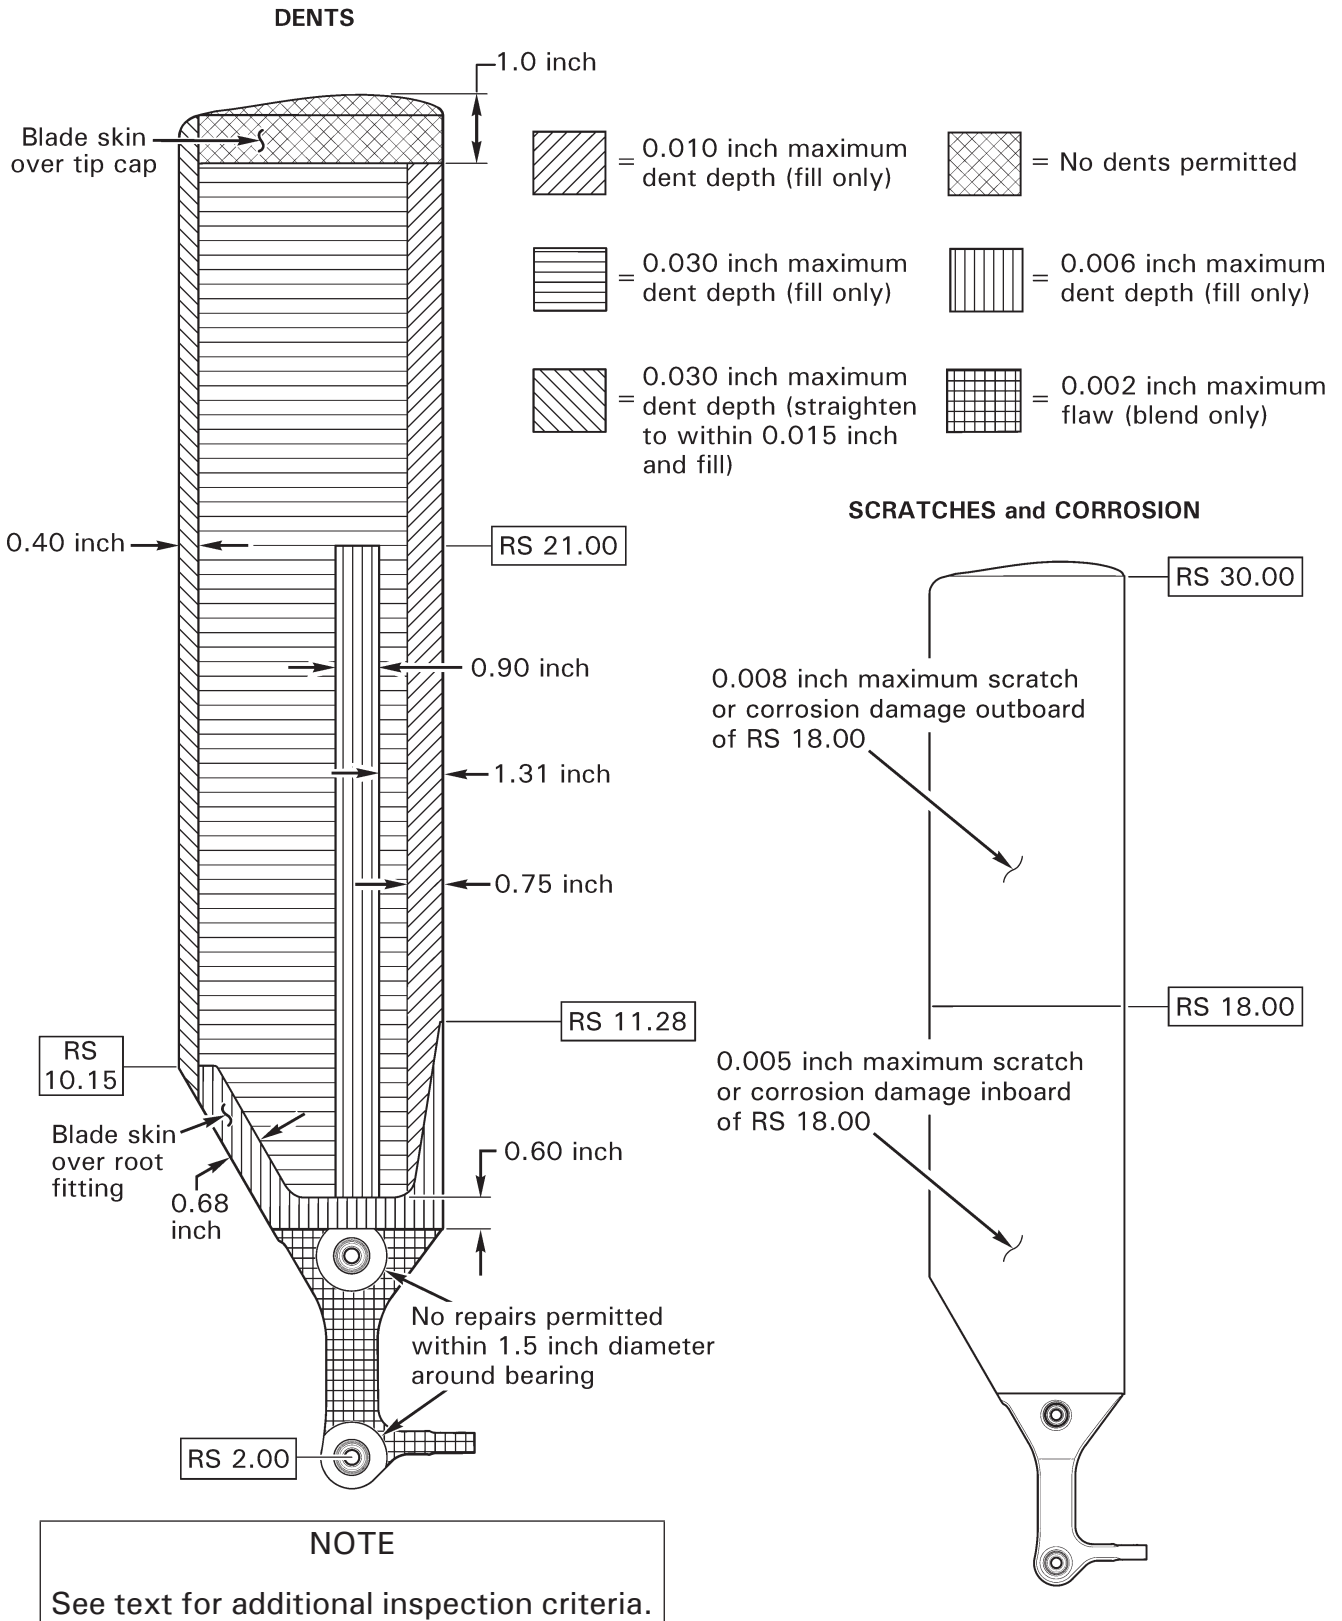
F029-1 BLADE INSPECTION CRITERIA
